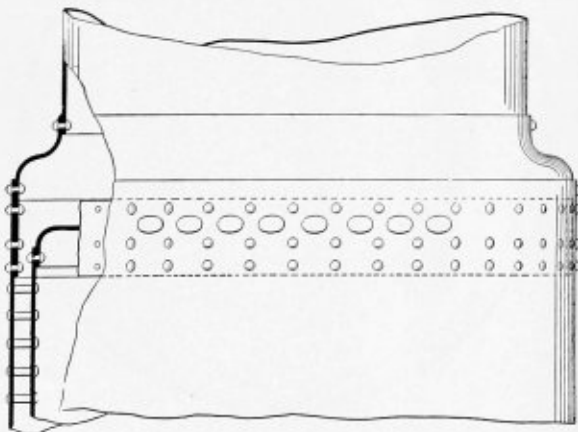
THIN OUTER FURNACE SHEET WITH SECTION ABOVE STAYBOLTS REINFORCED.
